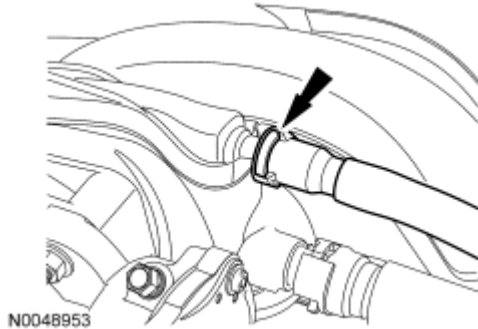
Locating EVAP Canister Purge Valve Vapor Tube
